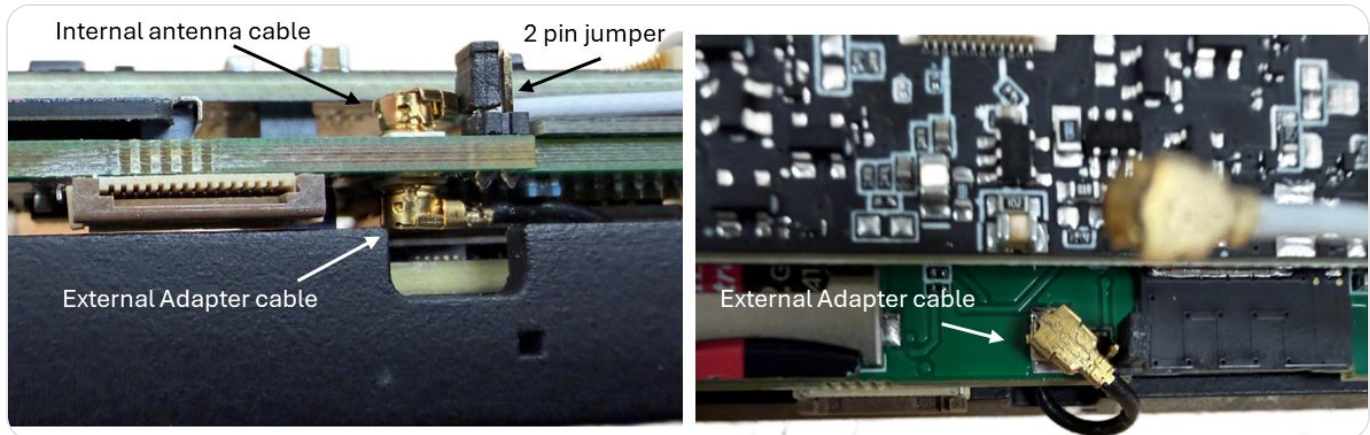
Left: side view of the Magpie showing the top-side internal antenna cable and 2-pin jumper (both disconnected for a passive antenna), and the bottom-side external adapter cable. Right: top-down view with the 2-pin jumper removed and the external adapter cable connected to the top-side antenna jack.
